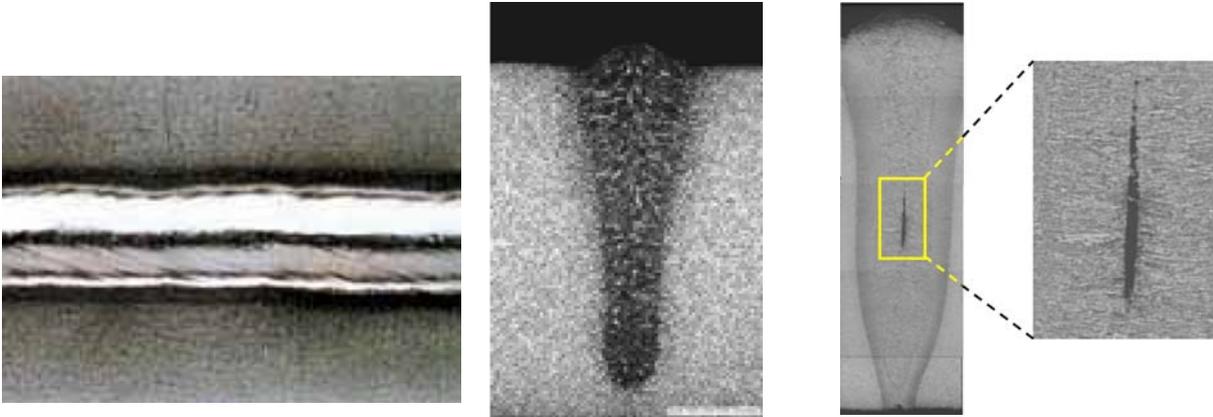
(a) weld surface, (b) cross section for a good joint, (c),(d) hot crack
